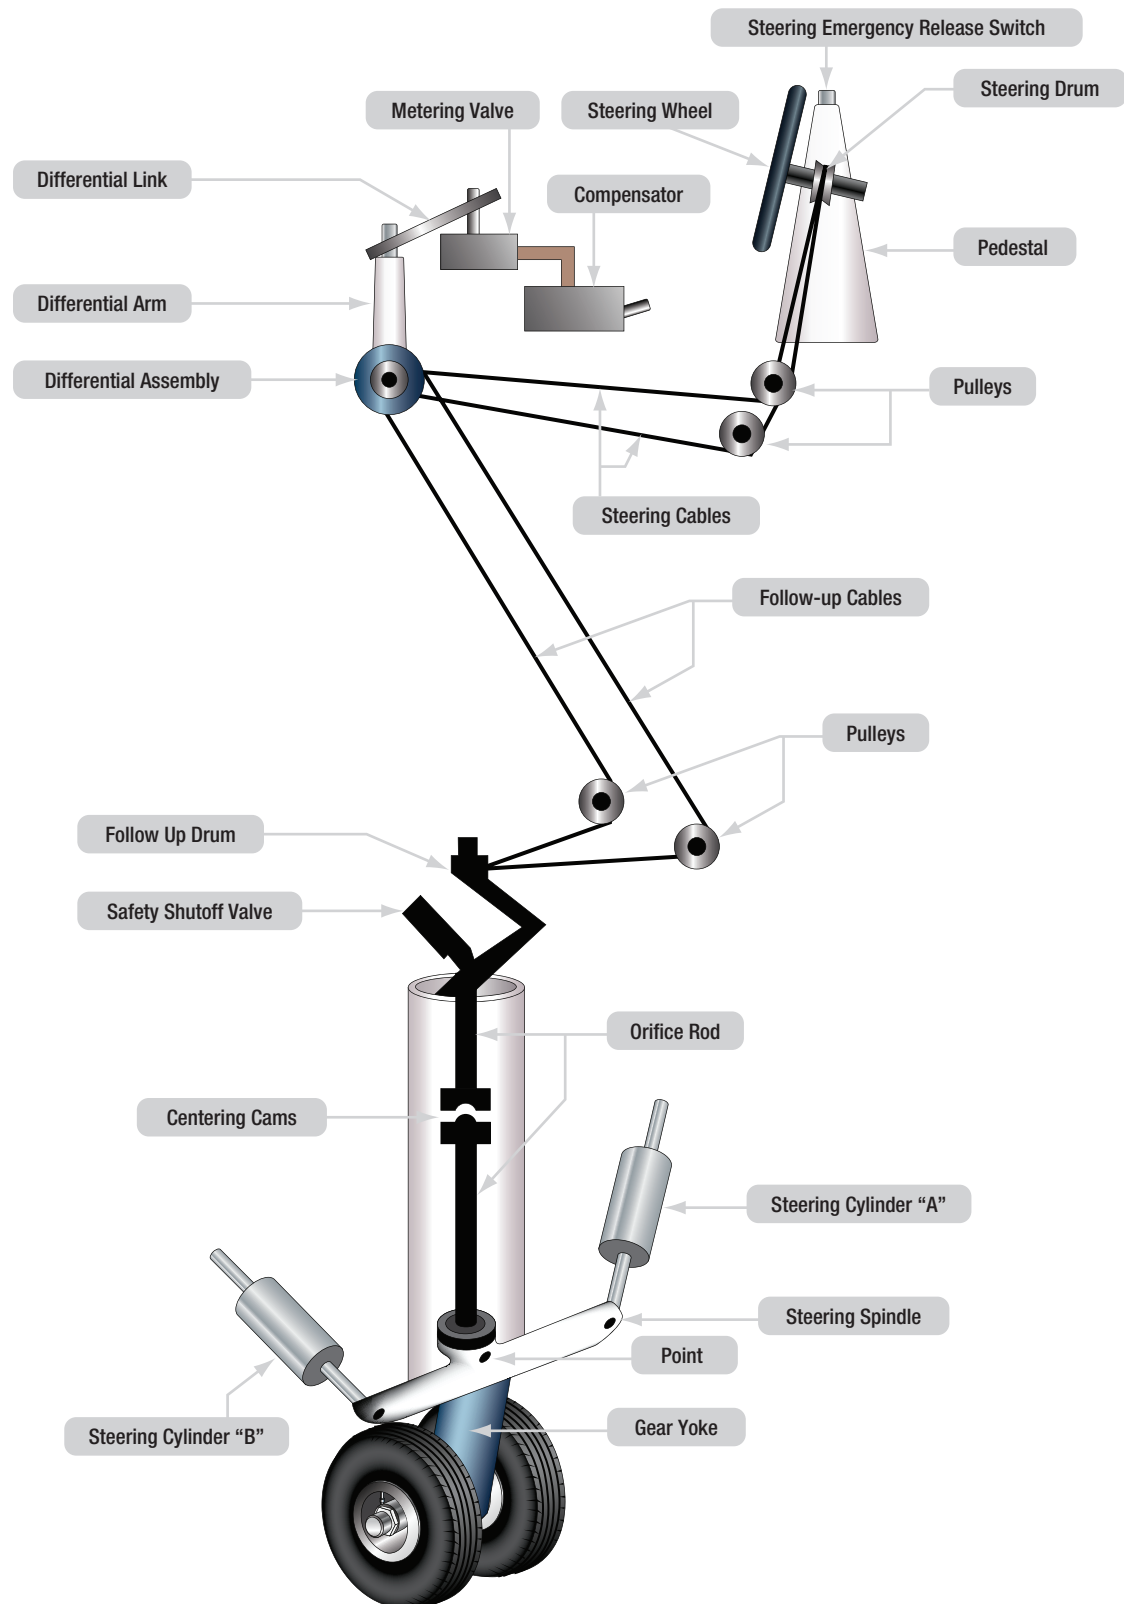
Example of a large aircraft hydraulic nose wheel steering system with hydraulic and mechanical units.
